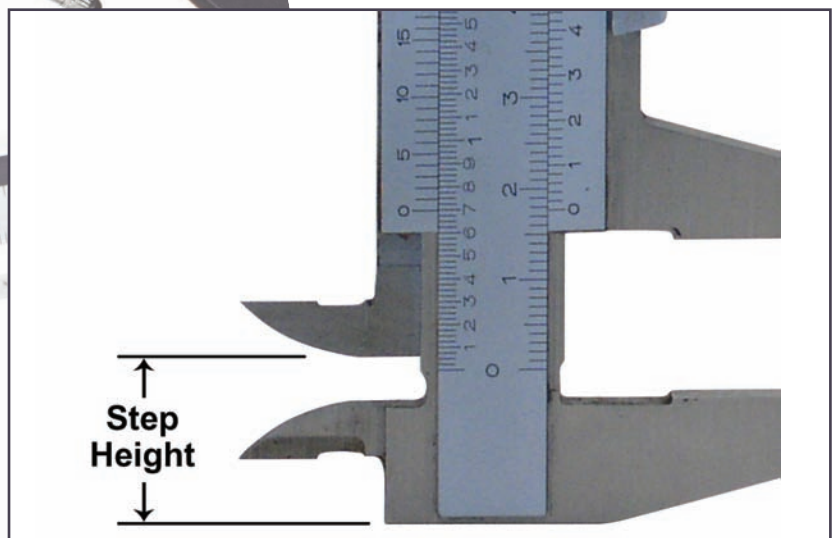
The ends of the fixed and moveable jaws align when the caliper is closed, so you can use the caliper to measure step height, too.
